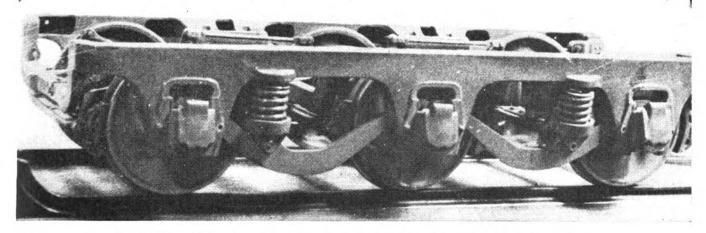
Truck with equalizer bars and springs in place-Center form and bolster springs removed
